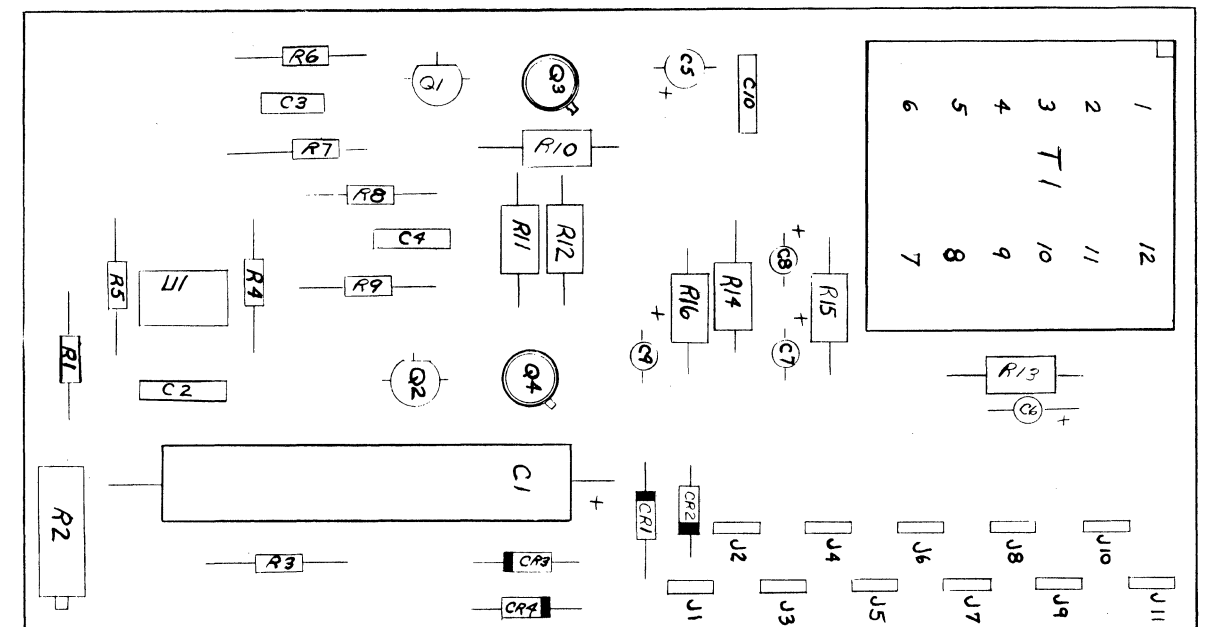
Oscillator Board (117 vac) Parts Location (836637)
